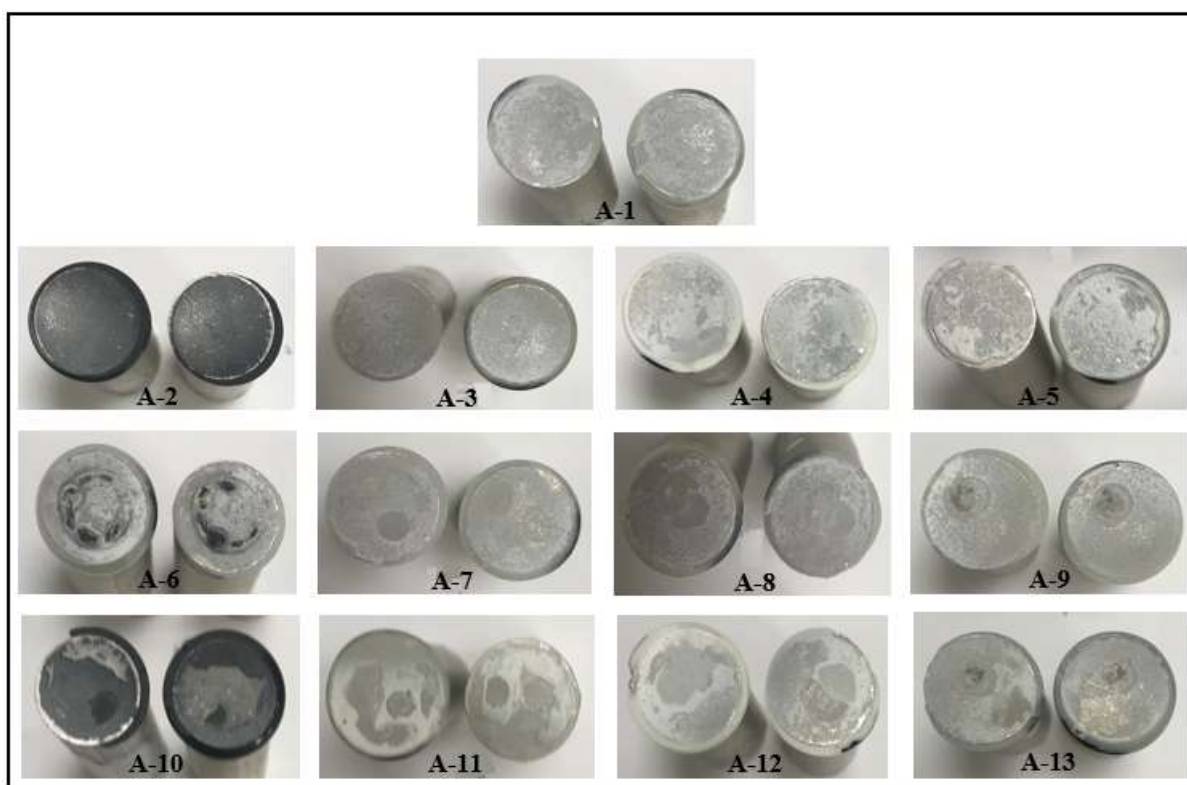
Fracture surfaces of butt joints after the tension test.
